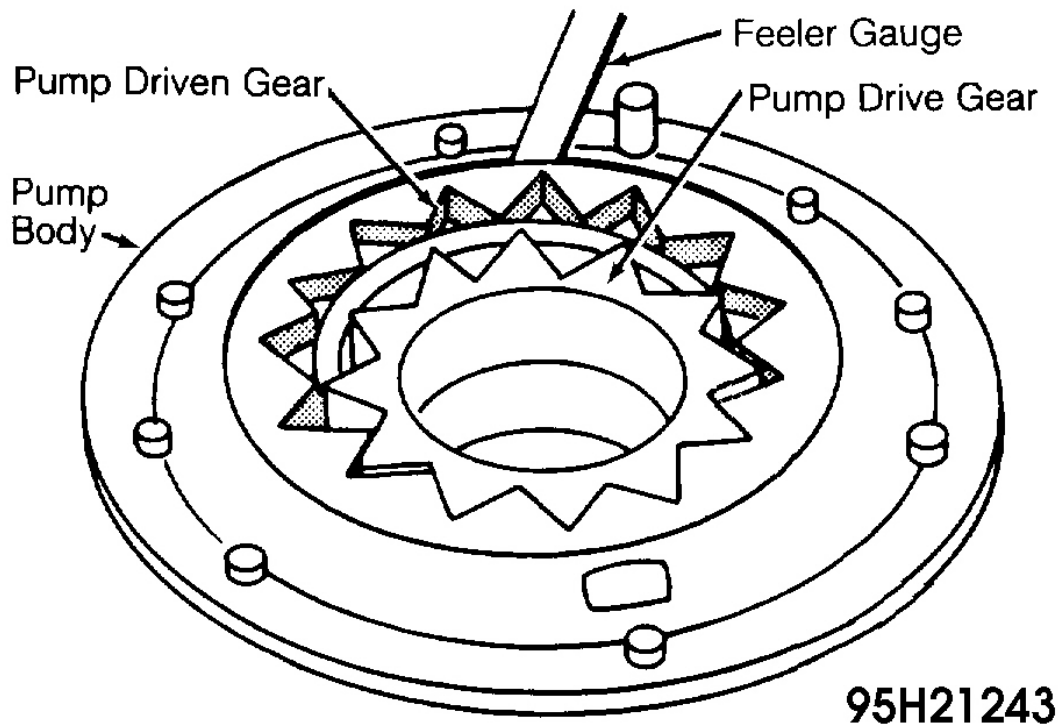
Checking Pump Body-To-Pump Driven Gear Radial Play
